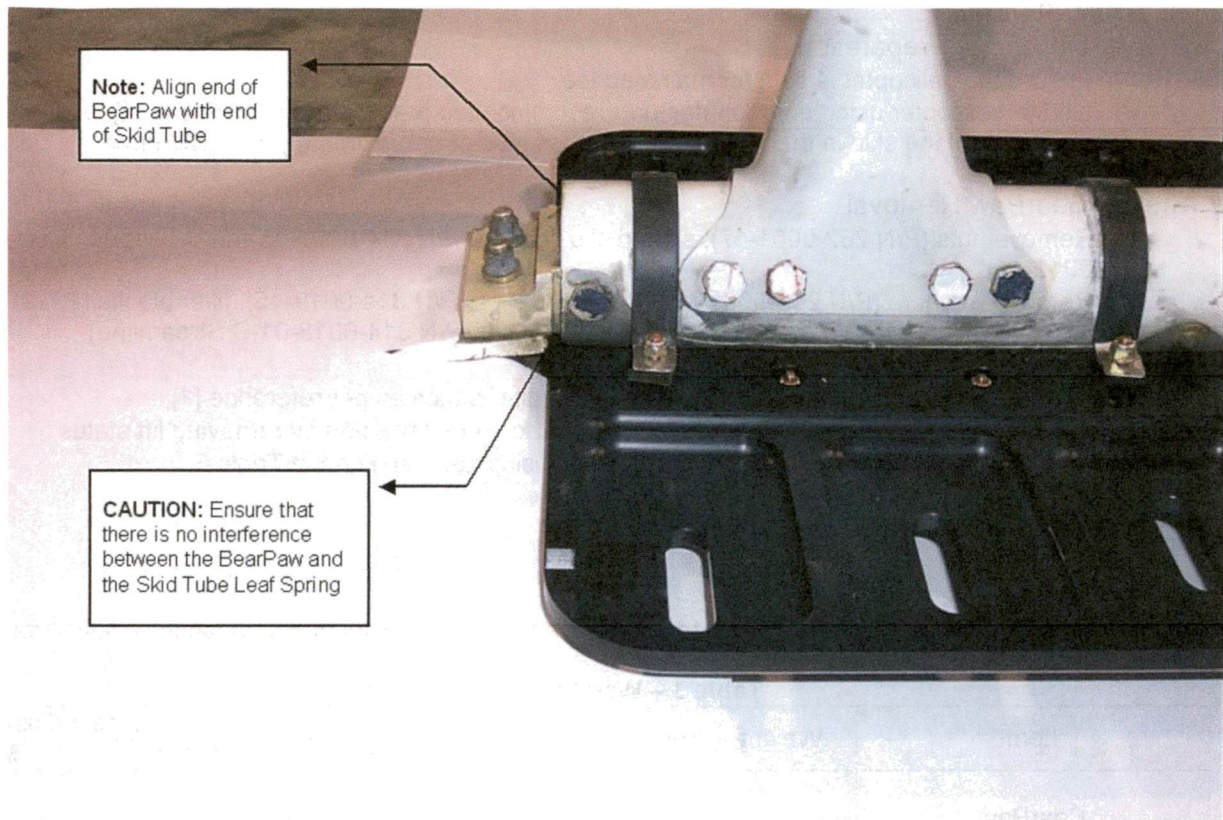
BearPaw Model BP350 (P/N 112-0002-00 or P/N 112-0002-00-S) - Alignment on Skid
